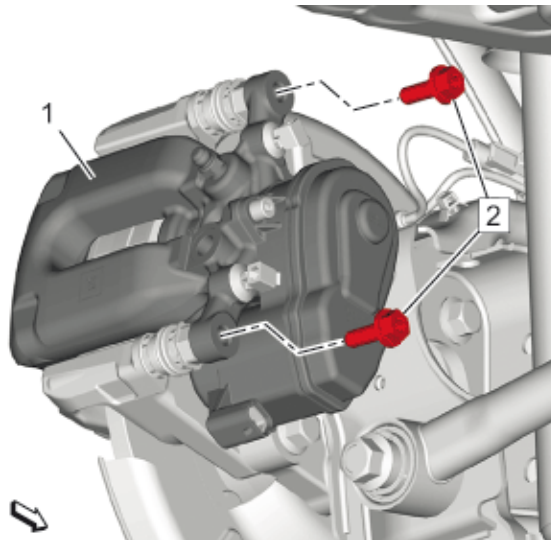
Rear Brake Caliper And Guide Pin Bolts
